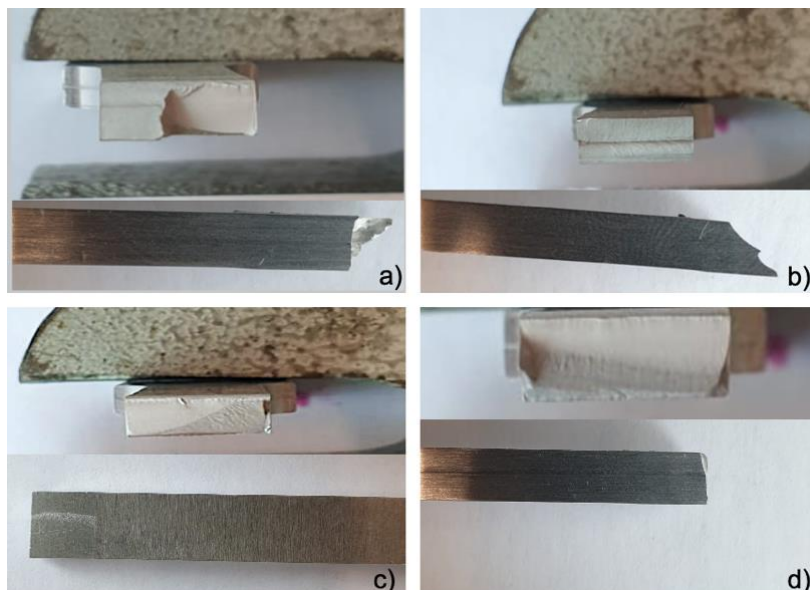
Fatigue fracture surface of the: a) L5-10, b) L3-5, c) L3-3, d) L3-1 specimen.
